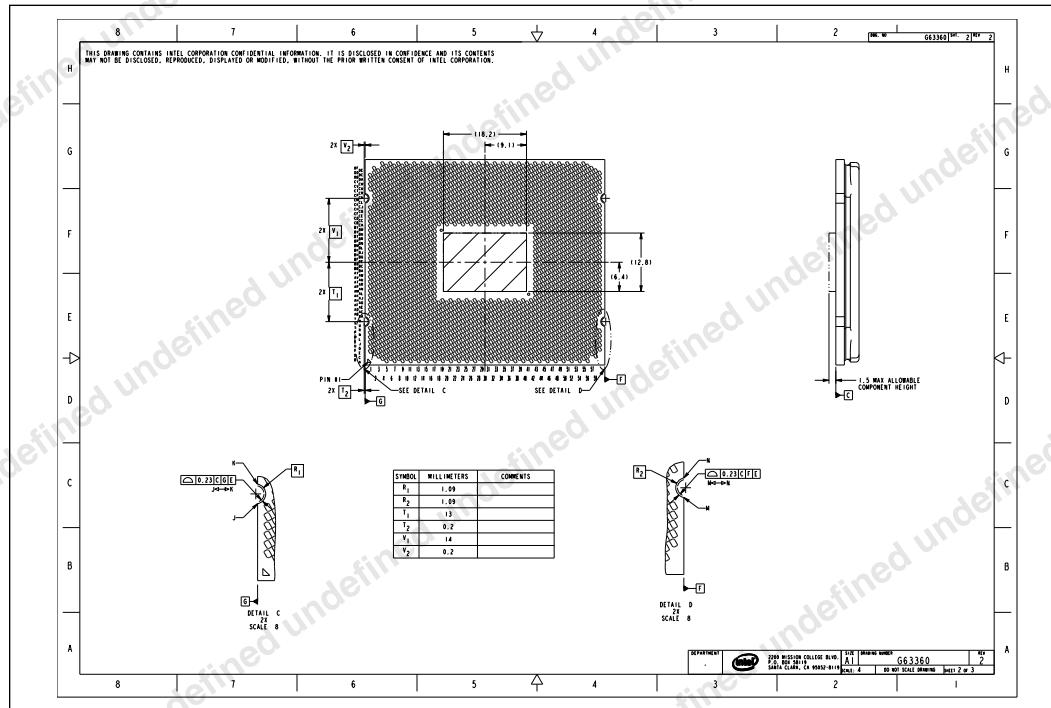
Intel® Xeon® Processor v3 Product Families Small Package Mechanical Drawing Page 1
